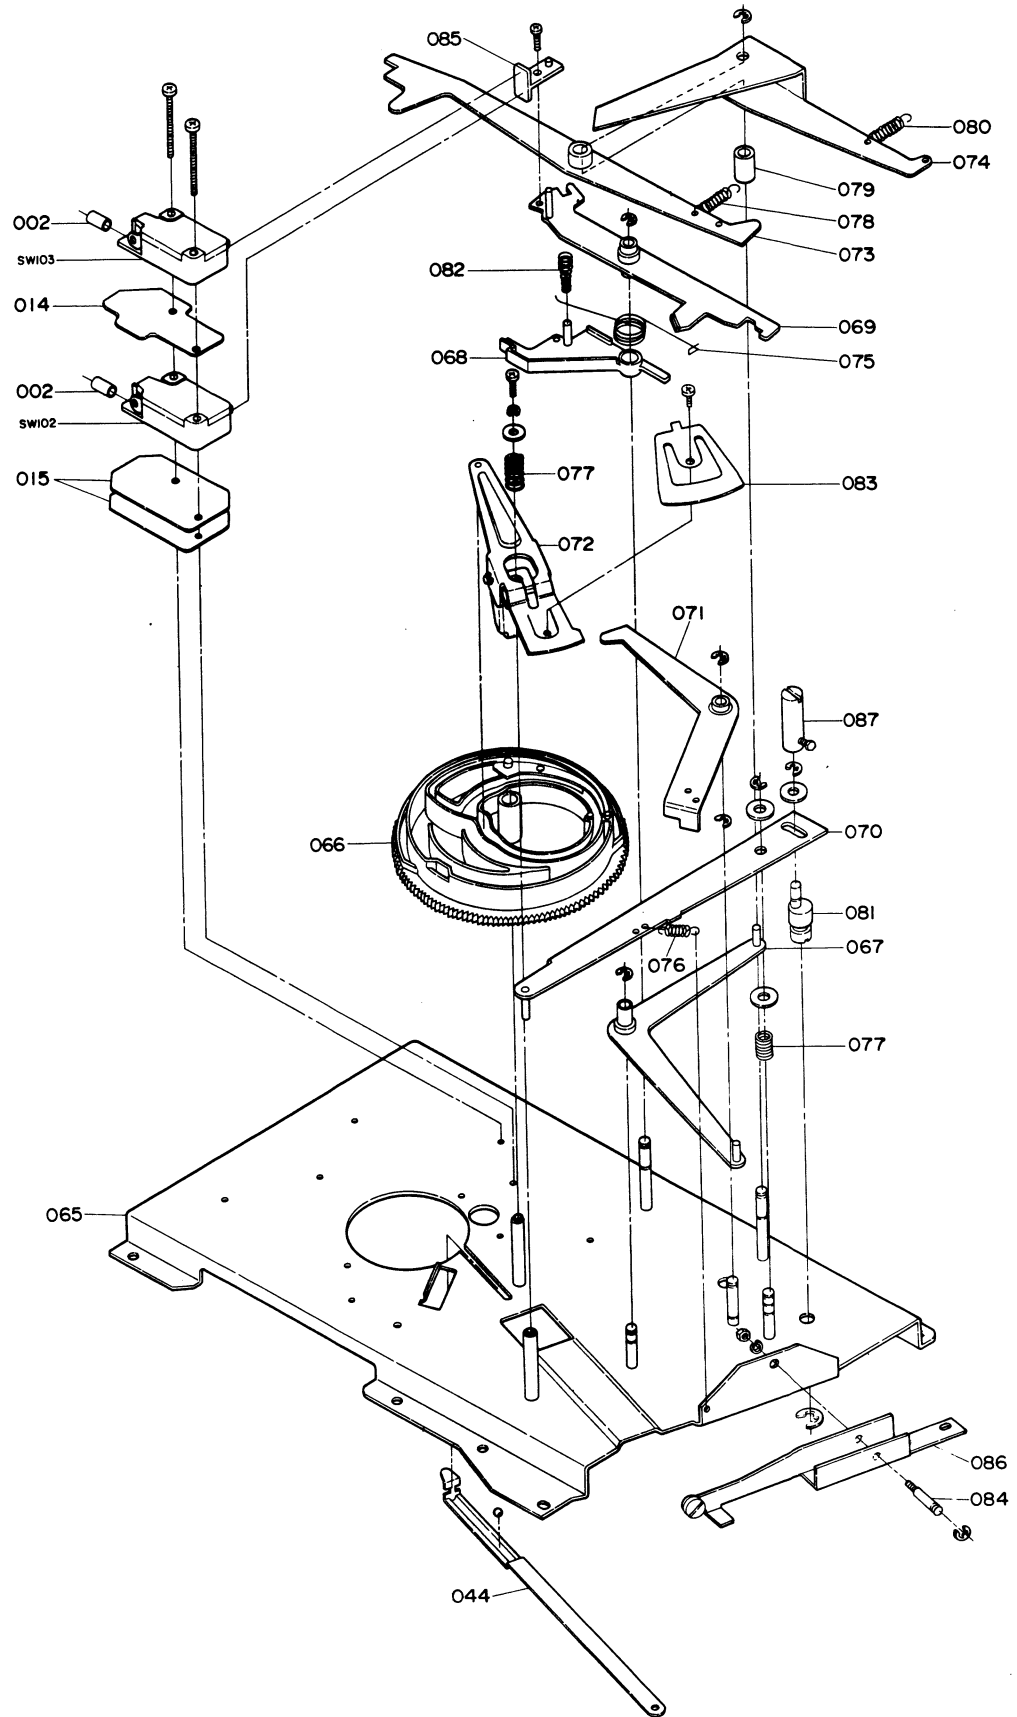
PLAYER EXPLODED VIEW (Sub-Chassis)
